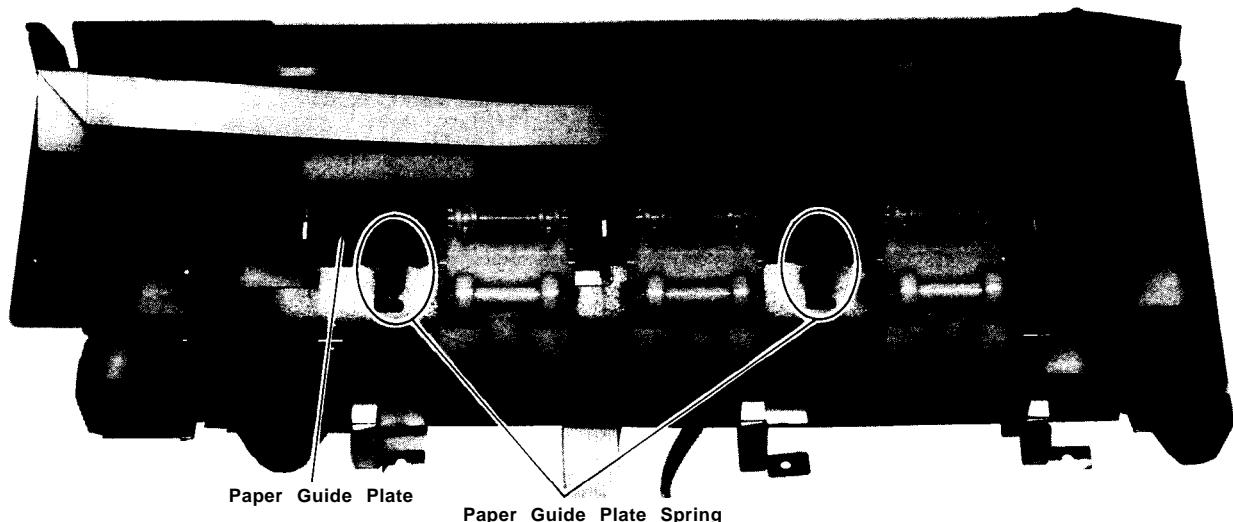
Positional Relationship Between Paper Guide Plate and Paper Guide Plate Springs
